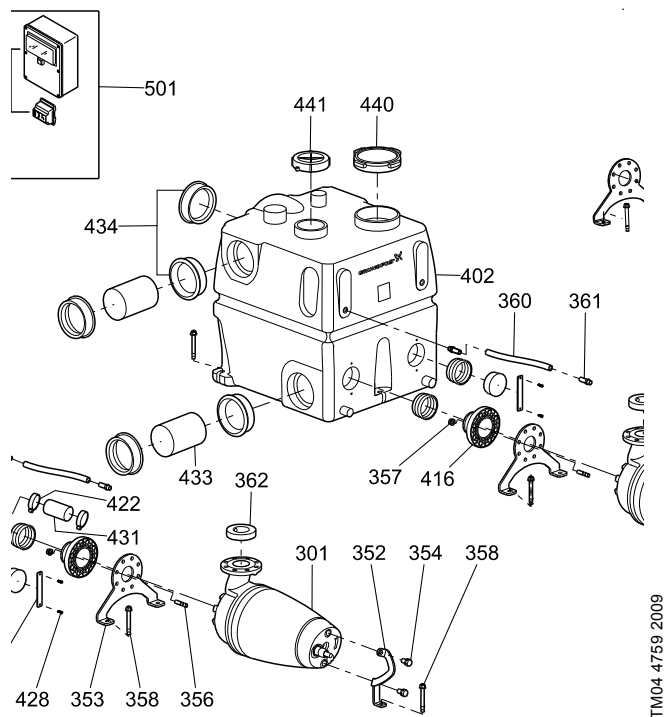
Exploded view - MD1, MDV Multilift with two tanks and SE pumps / SL pumps
